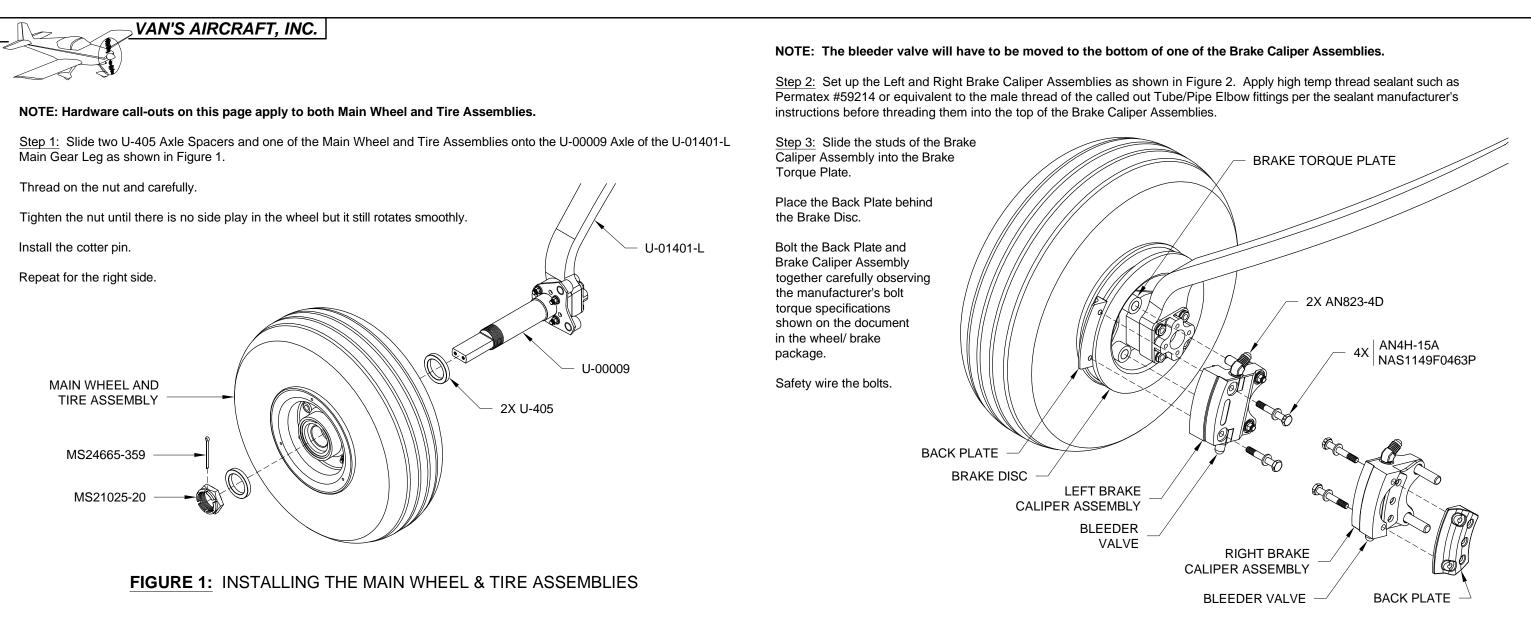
INSTALLING THE BRAKE CALIPER ASSEMBLIES
